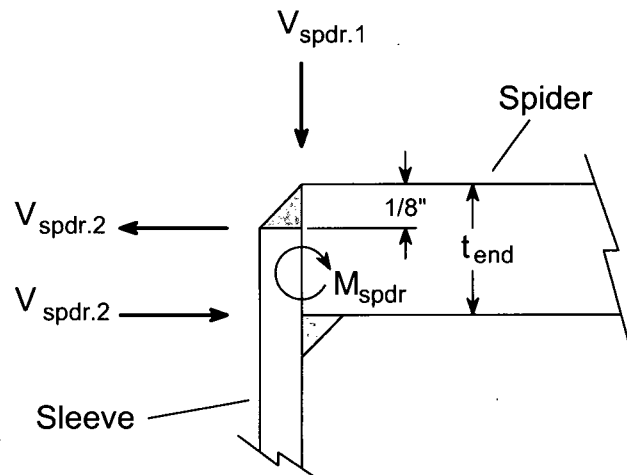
End Cover Stiffener Welds
